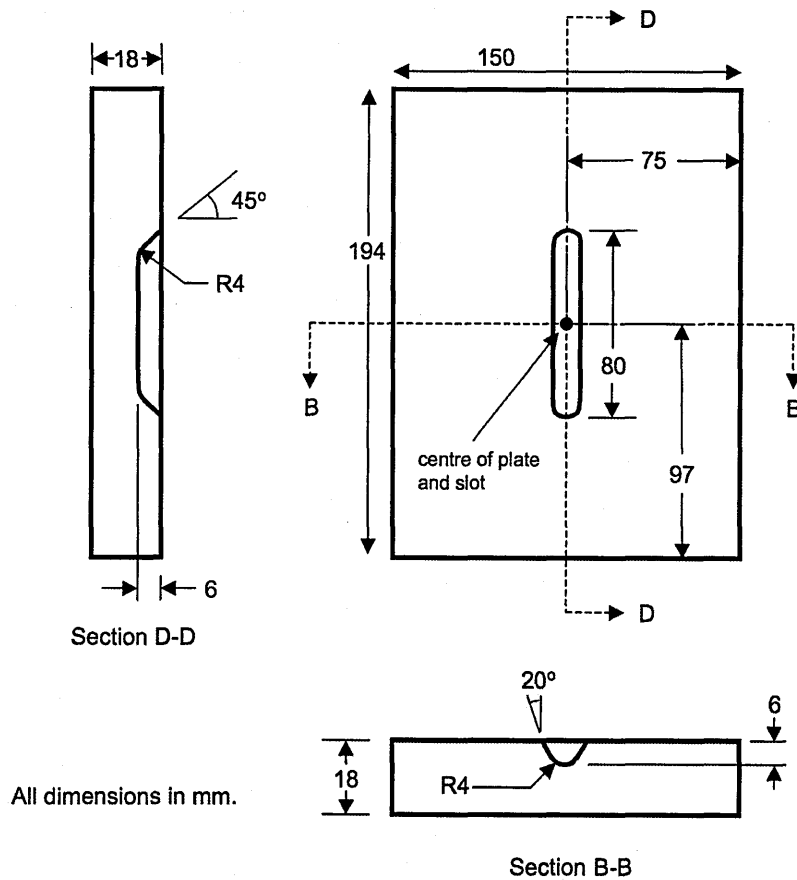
TG4 specimen dimensions and slot configuration, from [9]
